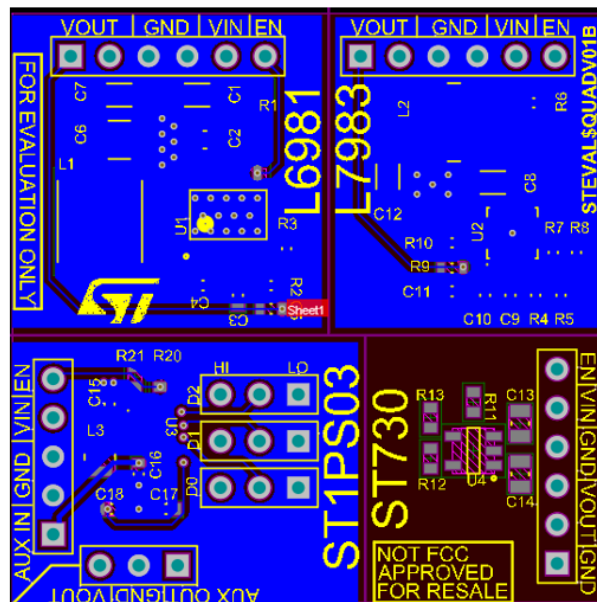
STEVAL-QUADV01 PCB layout (2 of 2)
